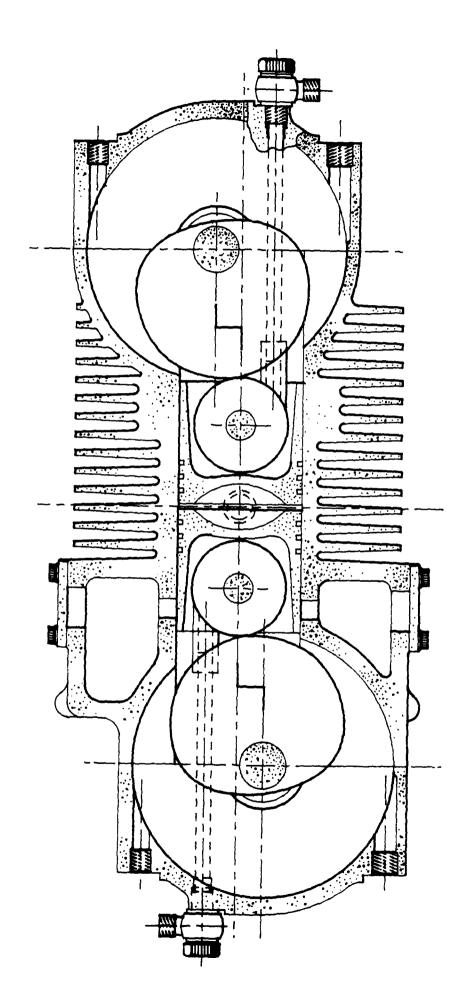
OPPOSED PISTON CAM ENGINE
